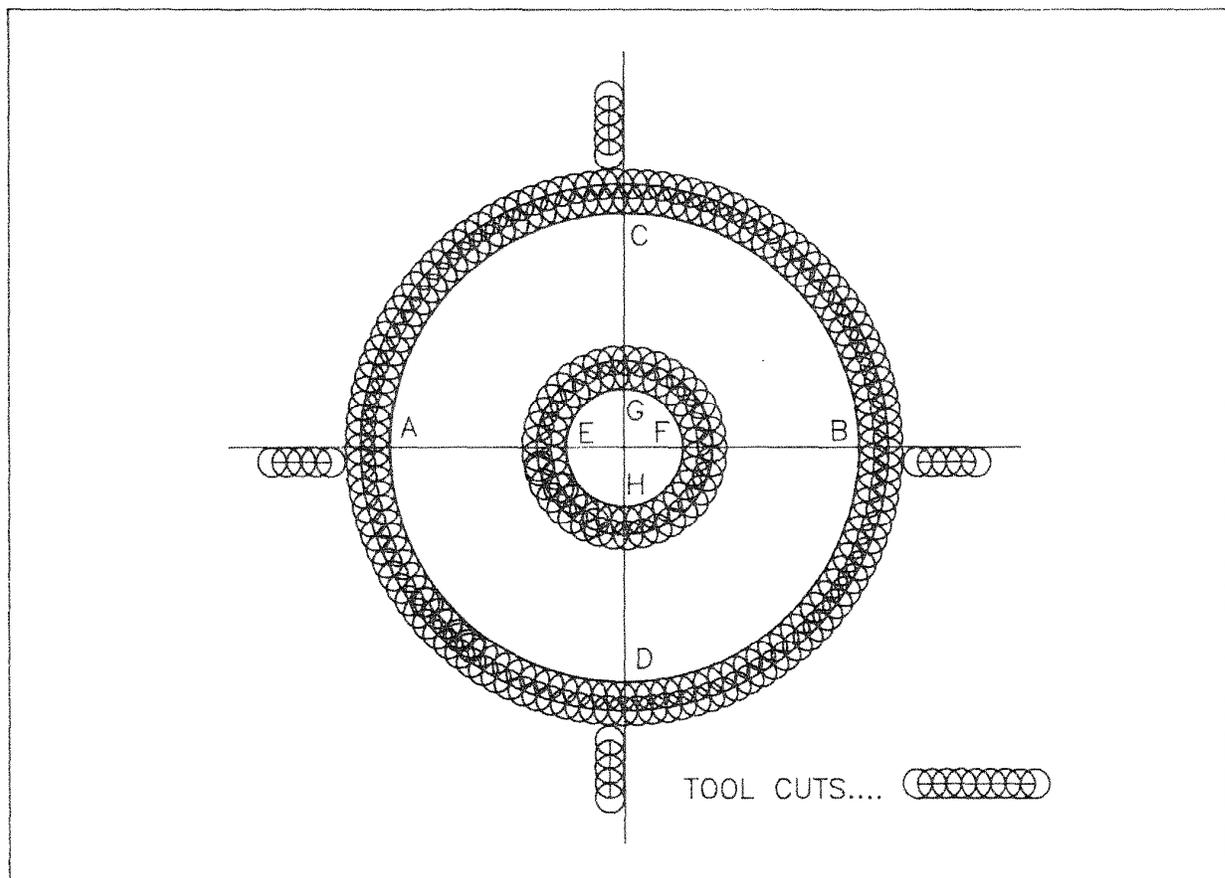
Drawing showing accuracy cuts in specified raw material and measurement points for both the 2-inch and 8-inch circles.
